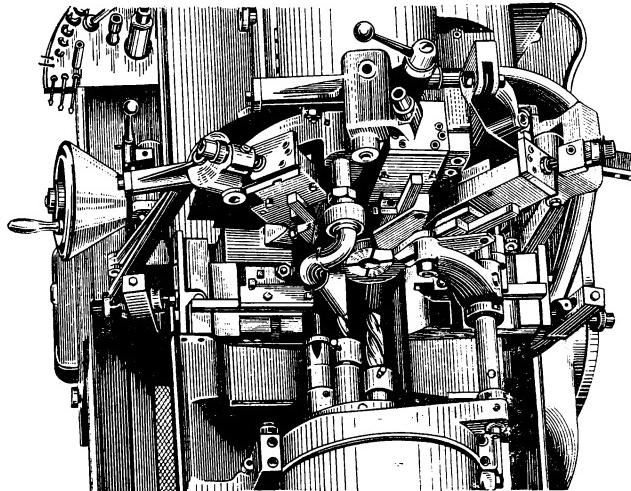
Working zone of the Manurhin automatic screw machine, model PF (France)
